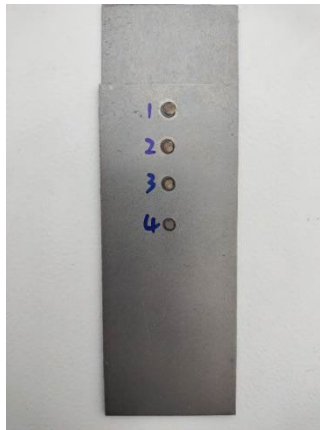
Weld joints in shunt condition (not adaptive)
